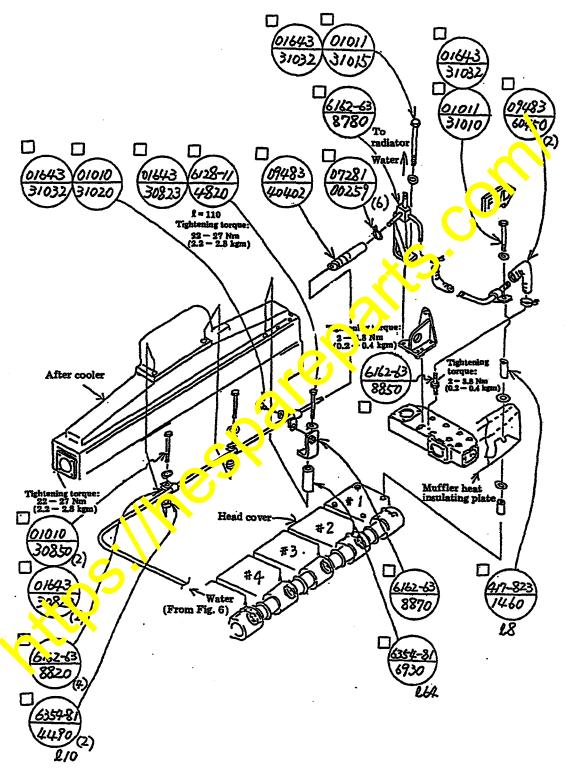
Cooling water tube between upper (front) side turbocharger outlet and thermostat cover system
